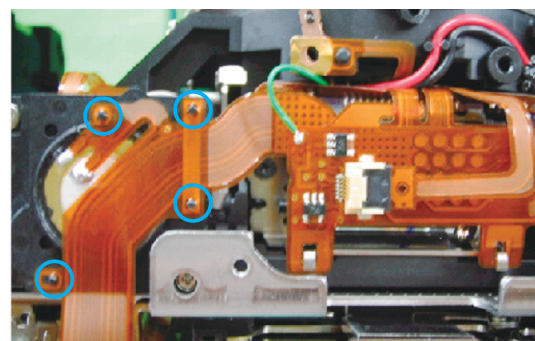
Auto Focus FPC Ass'y Assembly 4
